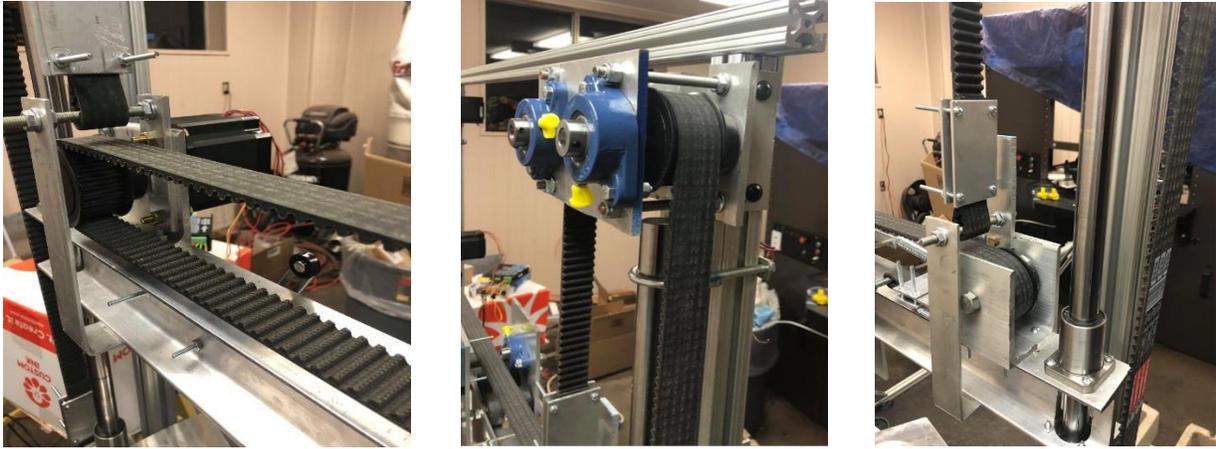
(Left) Close-up of the X axis assembly. (Center) Close-up of the Y-Axis pulley mechanism. (Right) Close-up of the Y-Axis pulley mechanism with the linear slides and bearings.
